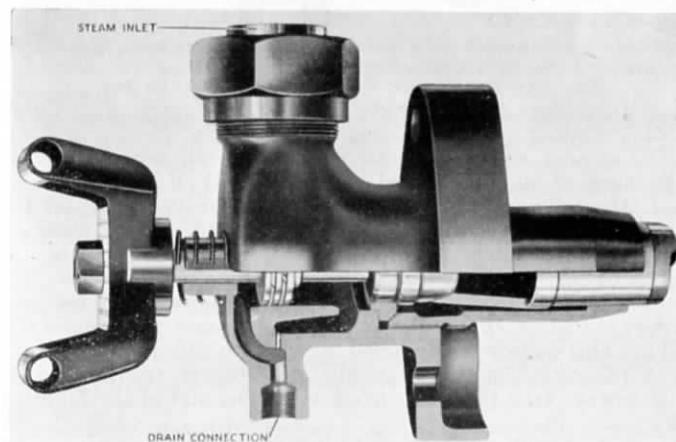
DIAMOND SOOT BLOWER: VALVE CLOSED.
